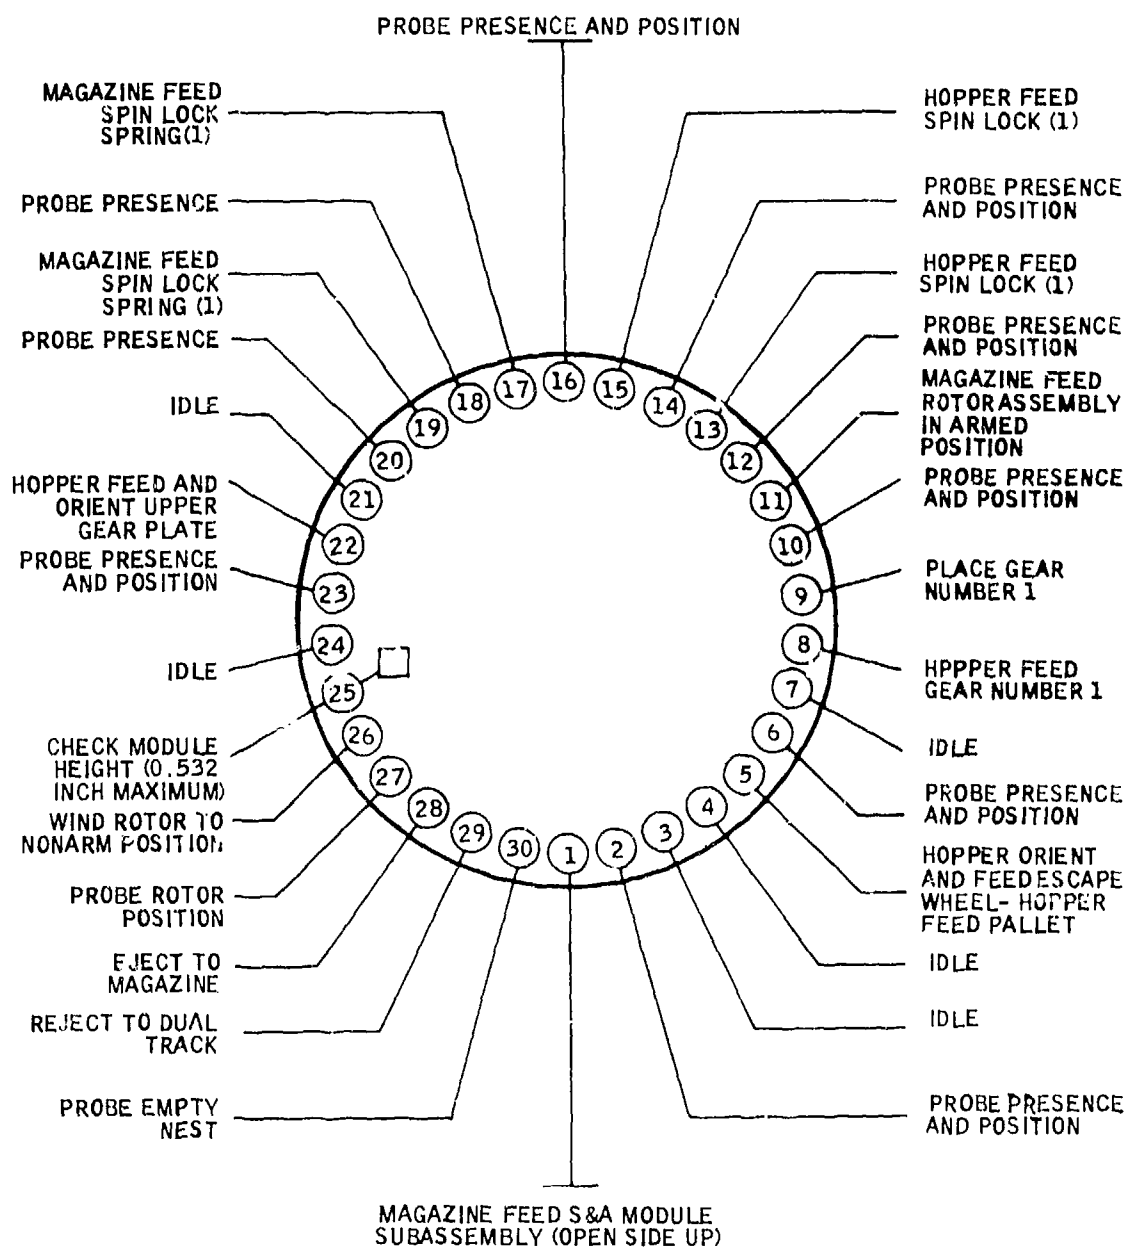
Dial schematic, machine S5 - S&A module sub-assembly operation 1 (gear train)
